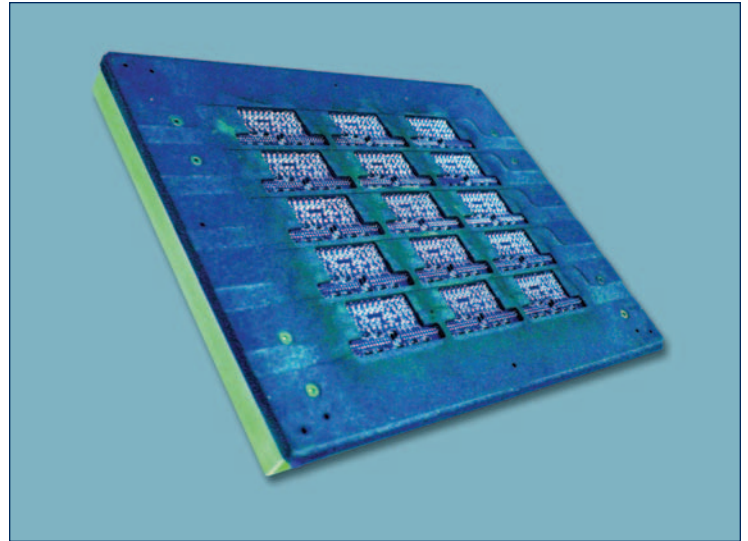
Bottom side of board is masked to only allow exposed pins to see the solder wave.
